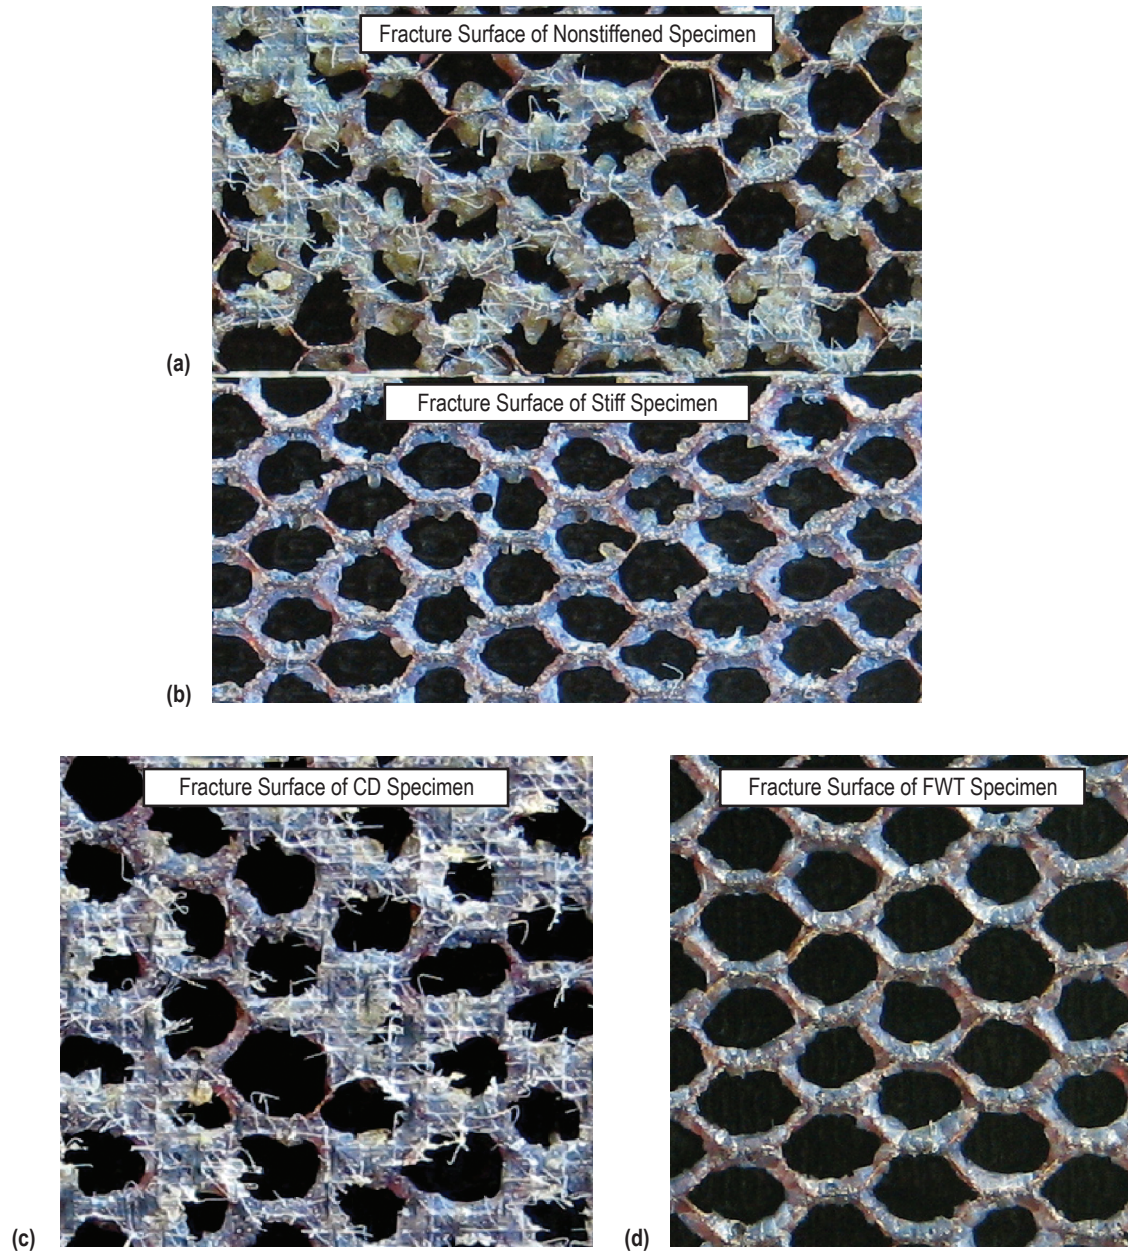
Photographs of the fracture surfaces of the (a) nonstiffened, (b) stiff, (c) CD, and (d) FWT specimens.
